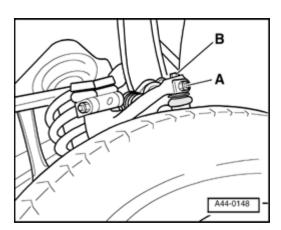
Loosening Hex Head Nut & Unscrewing Bolt Courtesy of VOLKSWAGEN UNITED STATES, INC.
